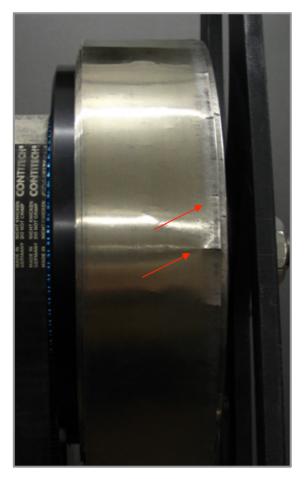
Used spring with clearly visible cracking. This spring should be retired immediately.
